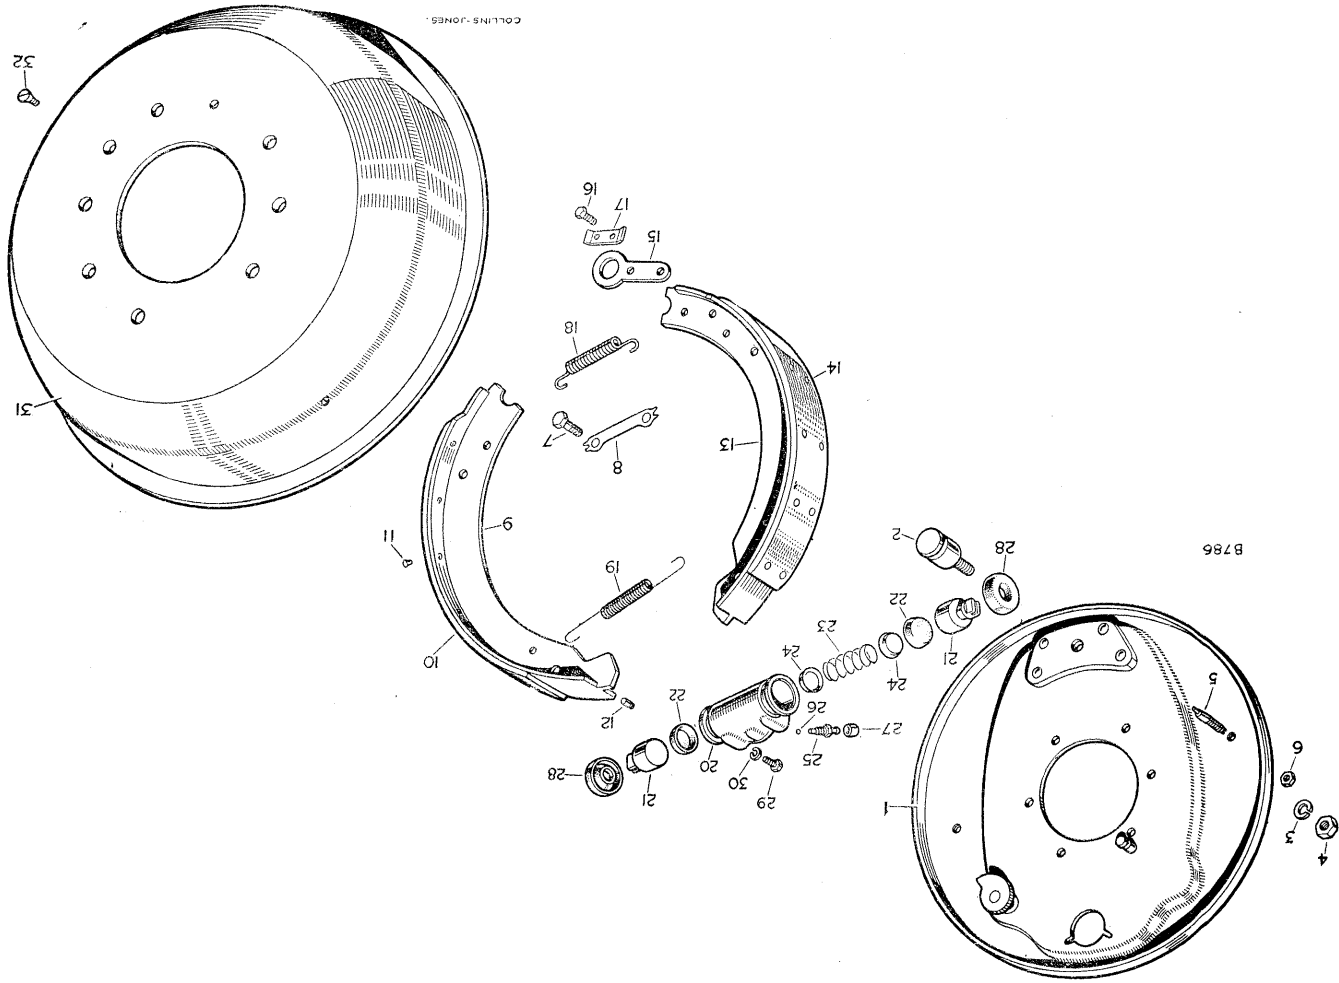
Layout of wheel brake unit—front and rear (10" brakes)
